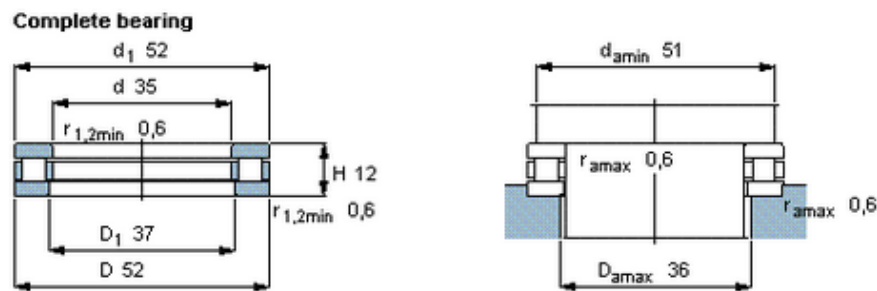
Cylindrical Roller Thrust Bearing 81107 TN design [36]
